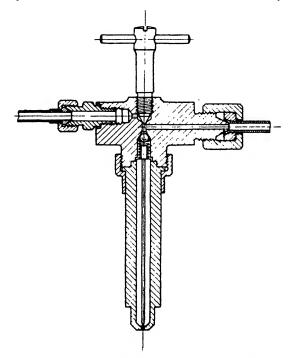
THE ORIGINAL RICARDO INJECTION NOZZLE
